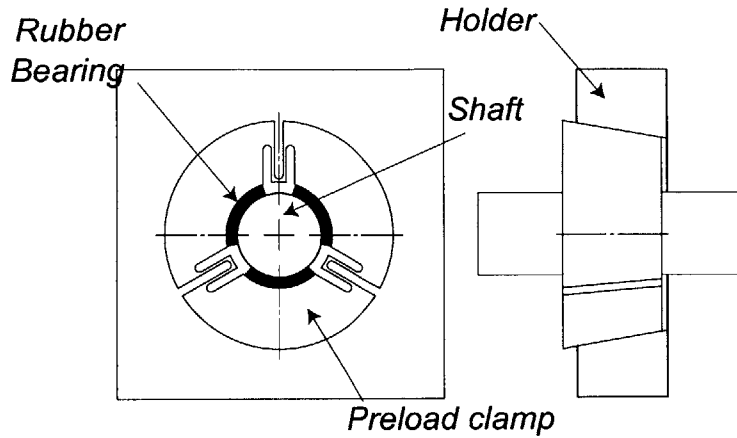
Linear and rotary rubber bearing with taper collet type preload.
